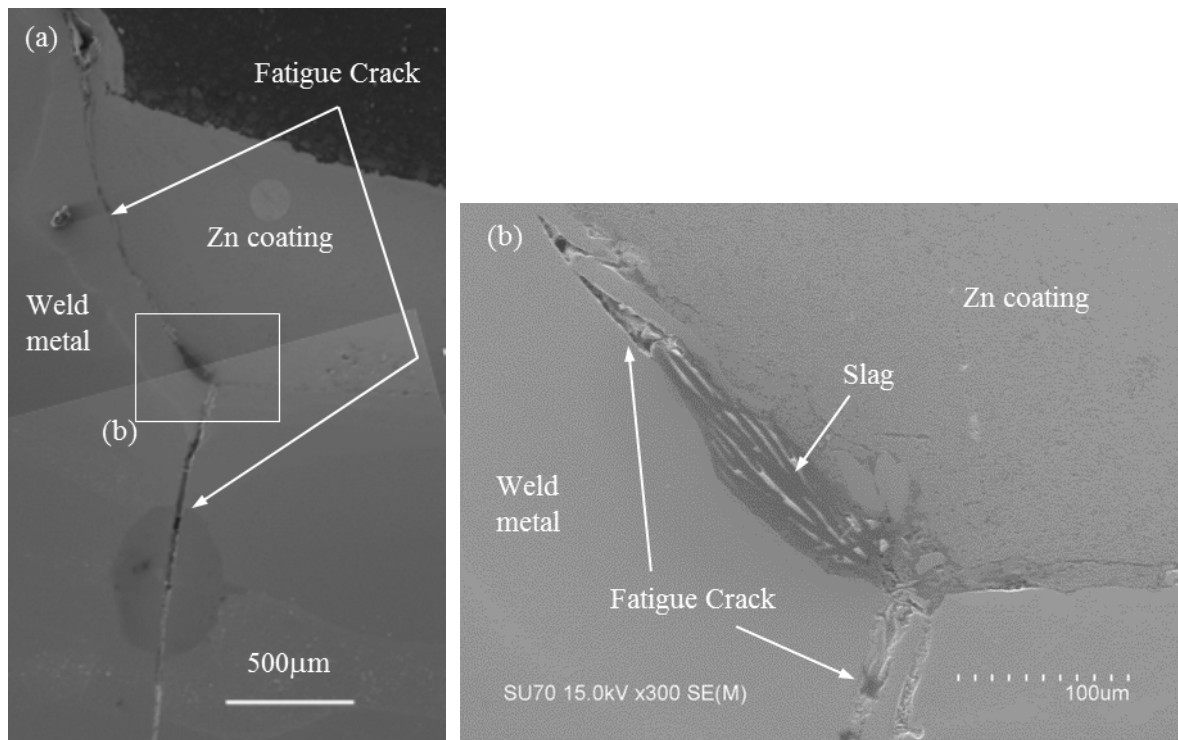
Fatigue crack of CS-Zn welded joint after fatigue test. (a) Cross section in the vicinity of weld toe, (b) higher magnification of (a).
